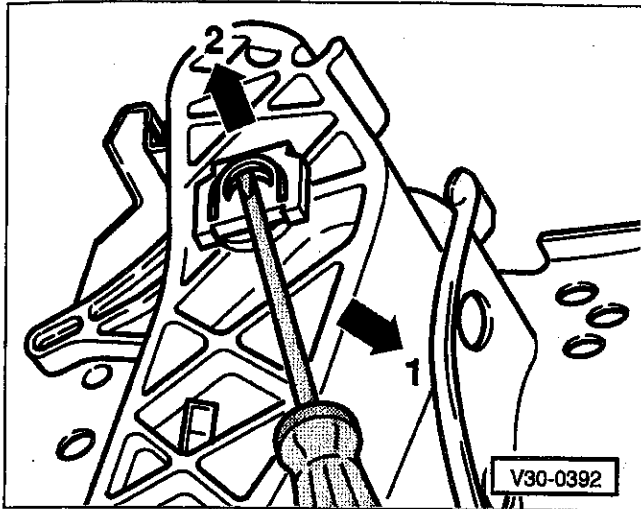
Clutch pedal retaining clip being removed. Pry up tab (arrow 1), then press off clip (arrow 2).
